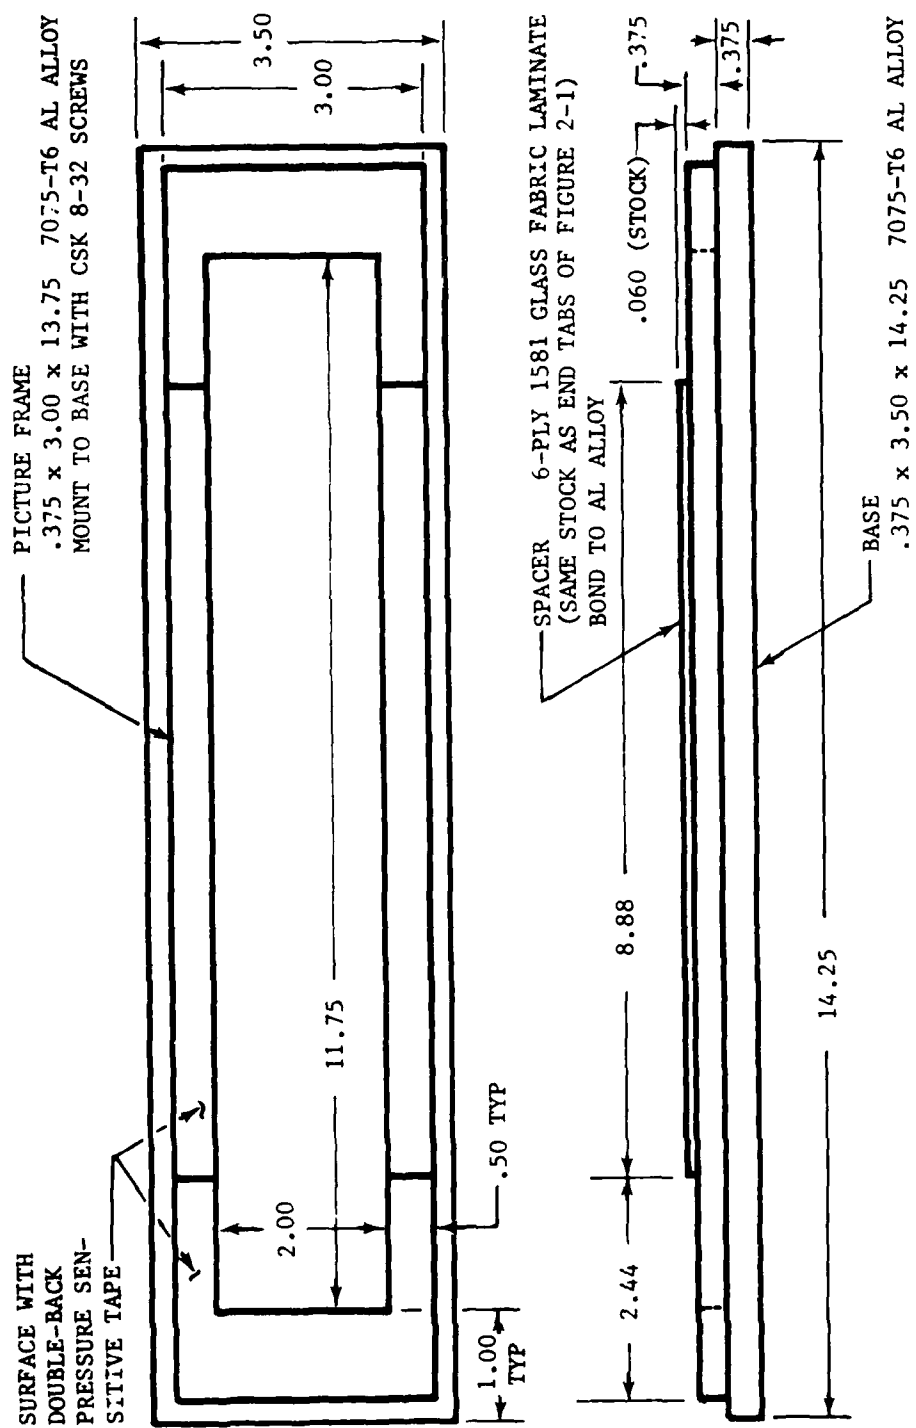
SPECIMEN SUPPORT DETAIL
